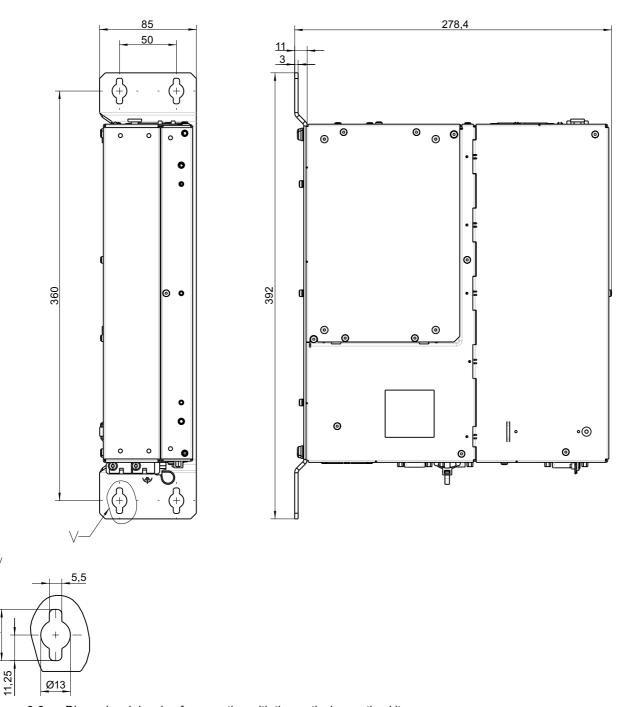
Dimensional drawing for mounting with the vertical mounting kit
